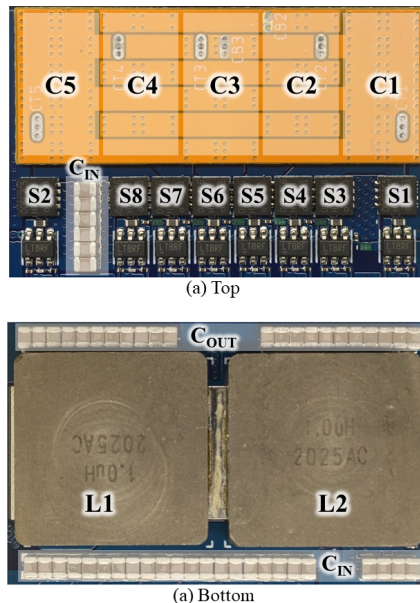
Photograph of the constructed prototype measuring 23.2mm \times 35.5mm \times 5.7mm.
